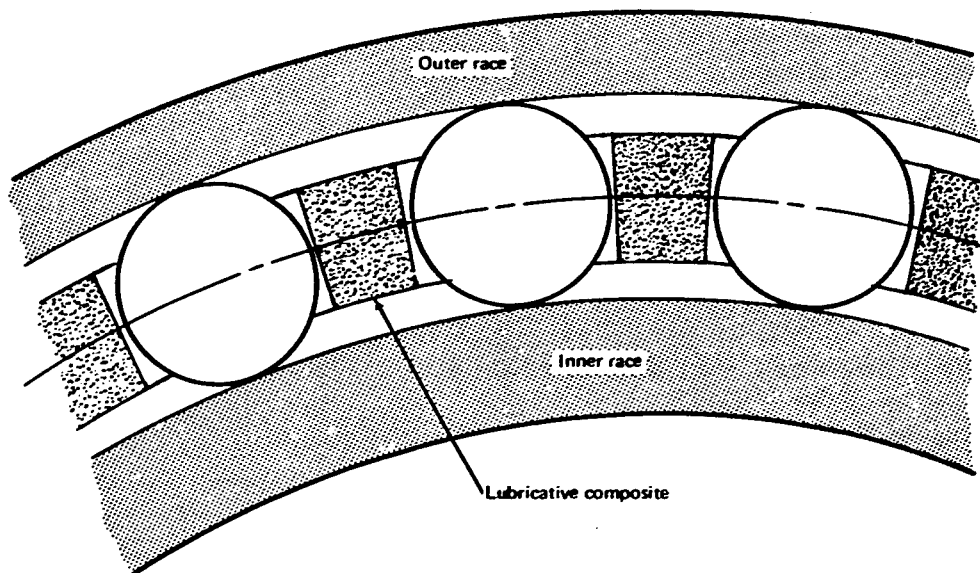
Composite ball-bearing retainer used in transfer lubrication.
